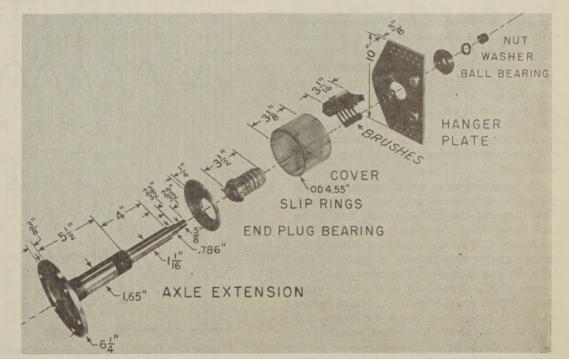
Exploded view of the slipring assembly used to transfer the electrical circuits from the rotating wheel to the recording instruments installed on the truck bed.
